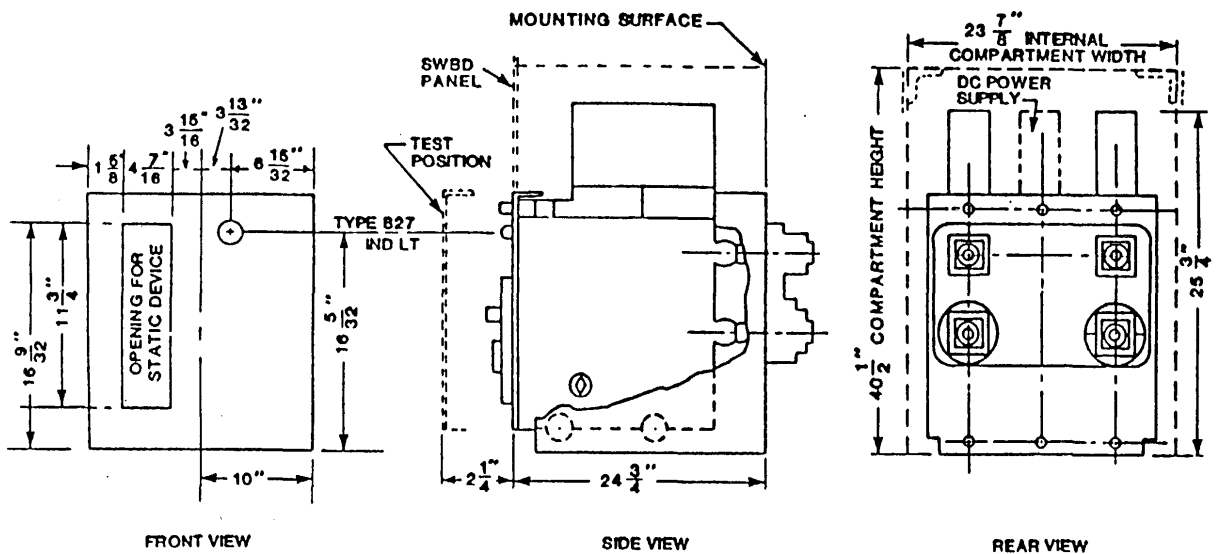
Outline and mounting dimensions for circuit breaker types ACB-3200HR, ACB-4000HR and ACB-5001R.
